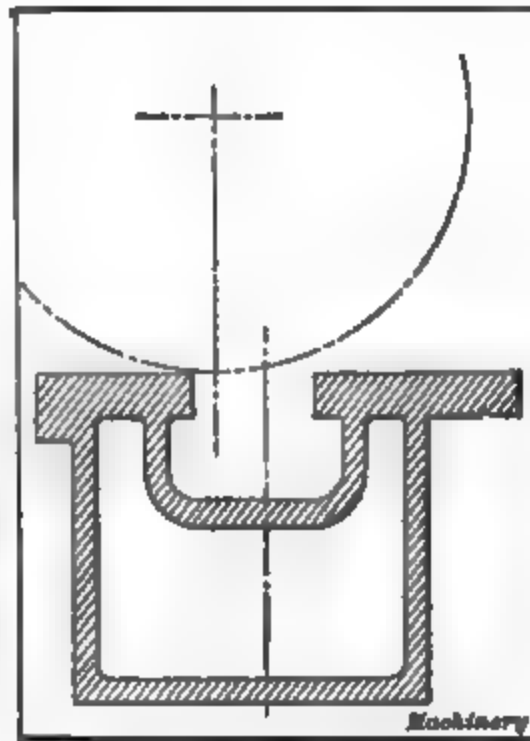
Closed Box Lathe Bed of a Type Manufactured by Thomas Ryder & Son, Bolton, England
